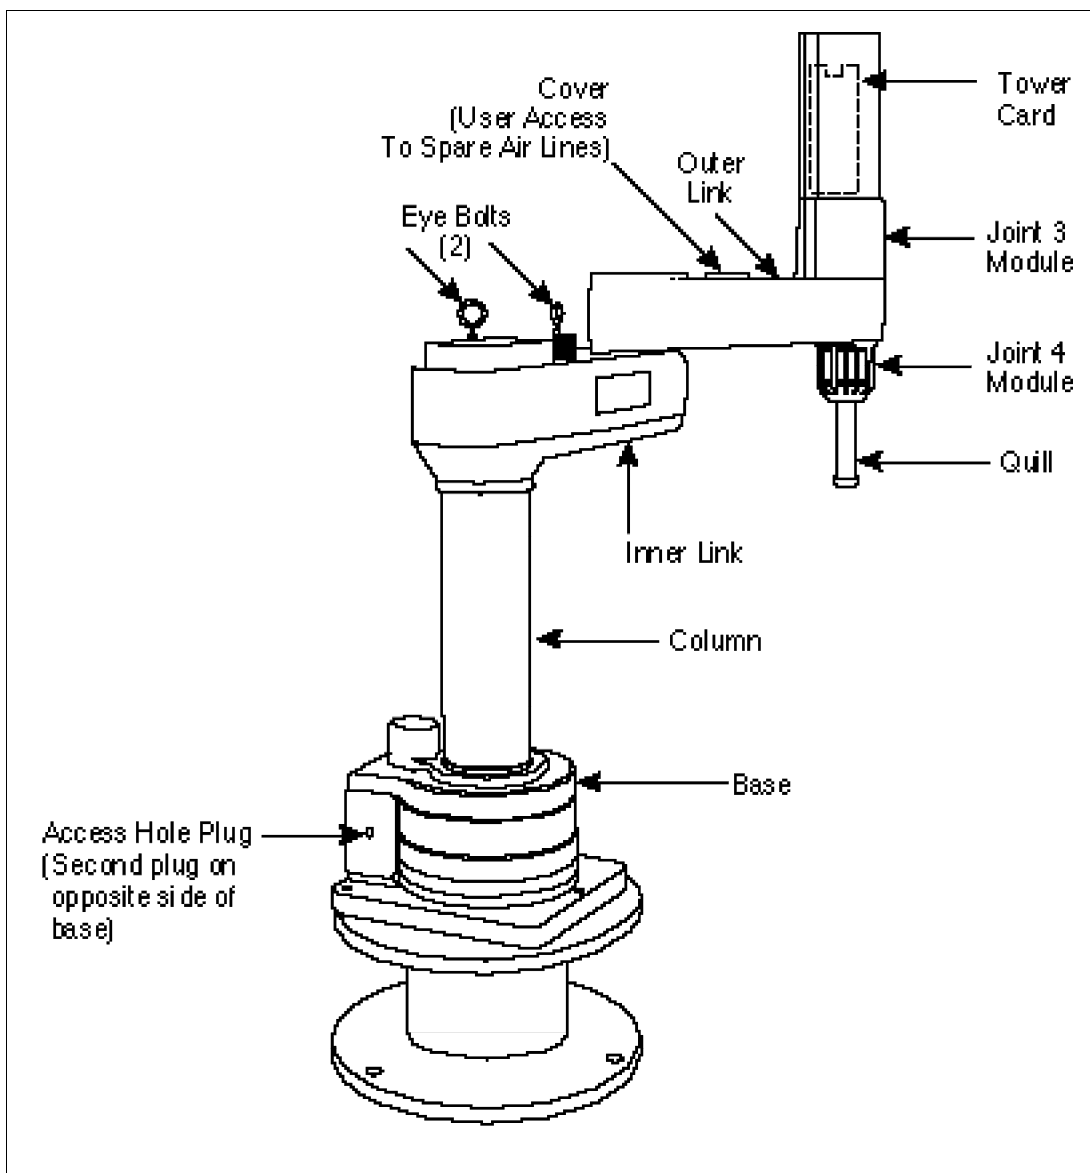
User Access to Spare Air Lines and Tower Card Location
